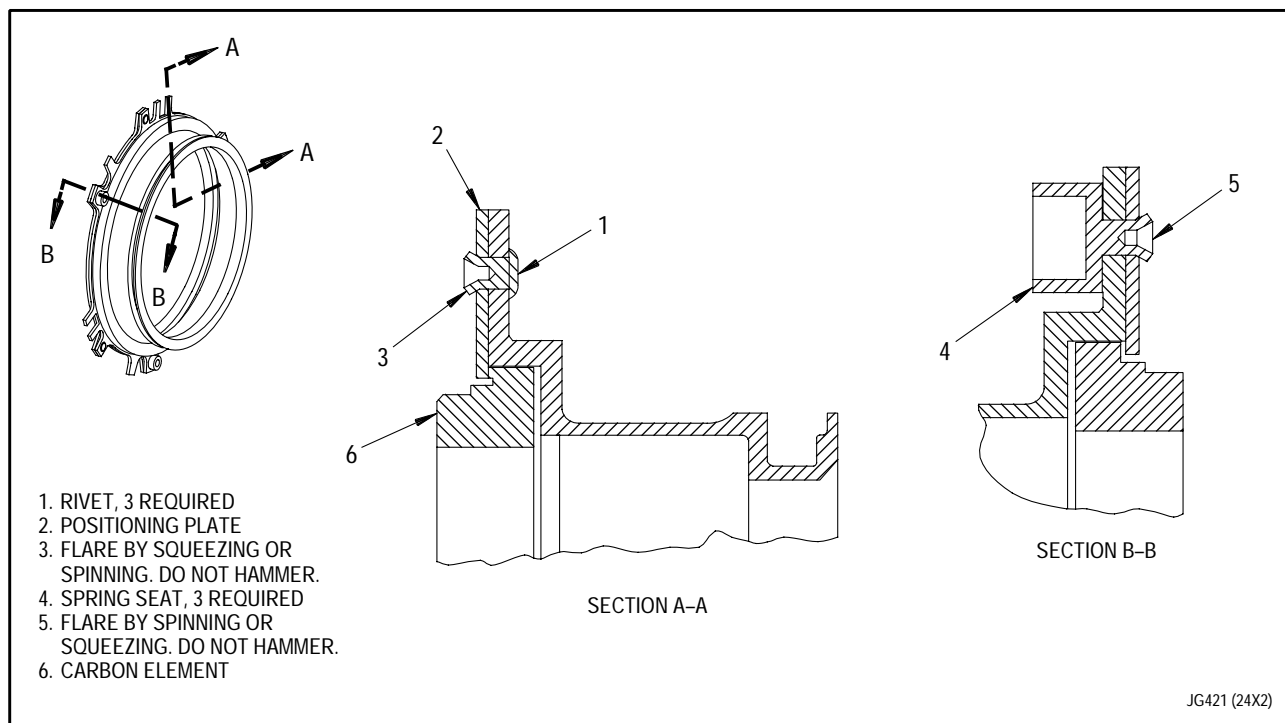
No. 3 Bearing Front Face Seal Assembly - Spring Seat or Rivet Replacement
